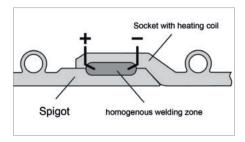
Welded joint - schematic representation; integrated E-socket
